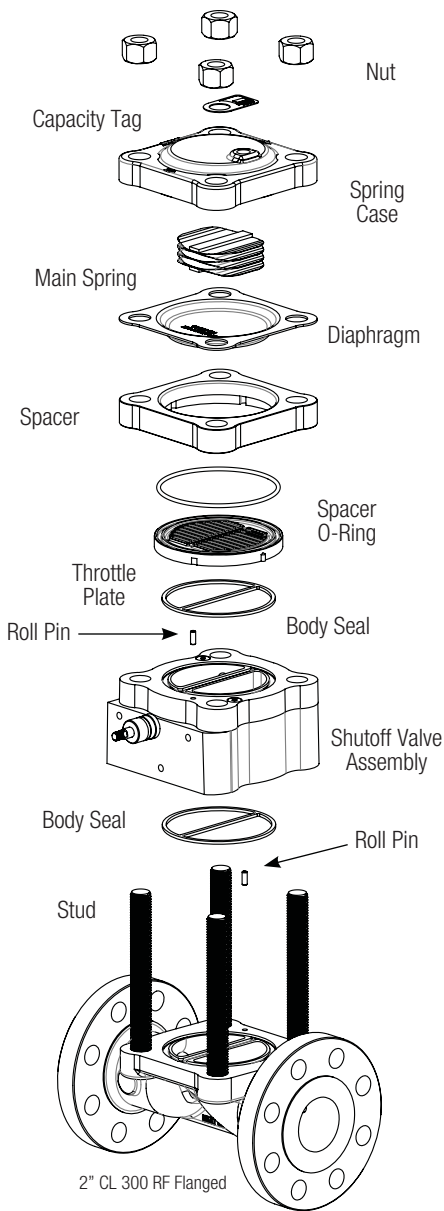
Removal and installation of the shut off valve from the regulator or valve body. (2\"/>
